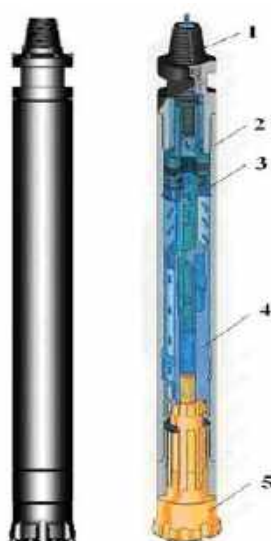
General view and design of the drilling rig "Atlas Copco".
